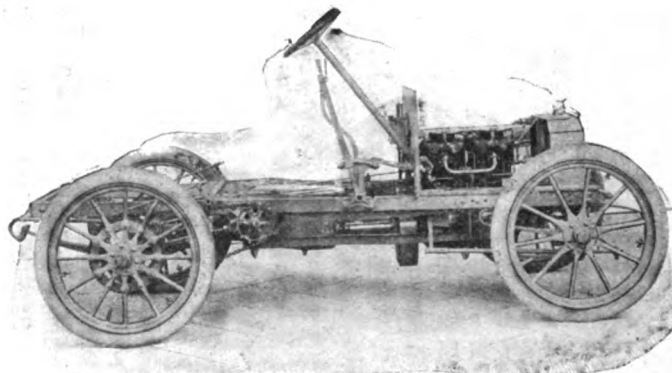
Chassis of Rochet-Schneider 22-b.h.p. Car.
